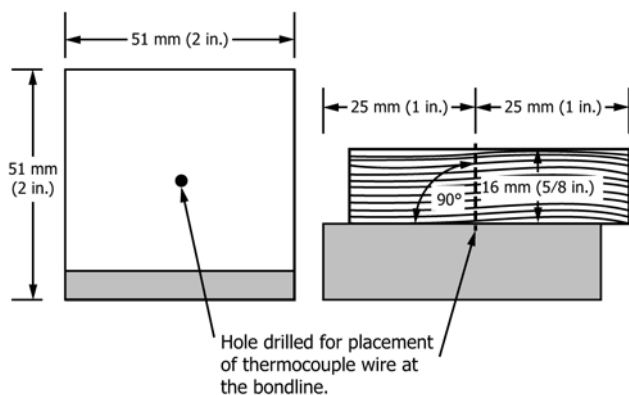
Top View (Left) and Side View (Right) of Drilled Hole for Thermocouple Placement
